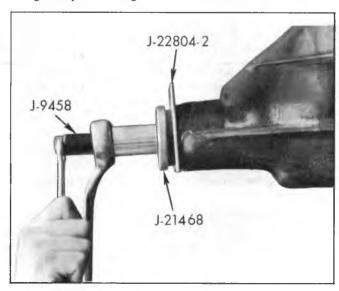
B-Drive Pinion Flange Oil Seal Installation (Light Duty)
